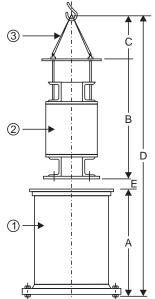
Arrangement for lifting core coil assembly from tank
